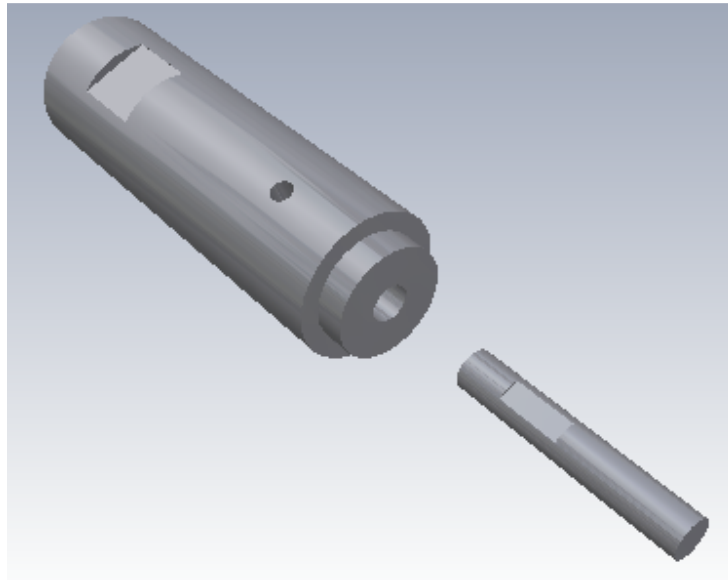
Friction Stir Welding tool design for tracer experiments
